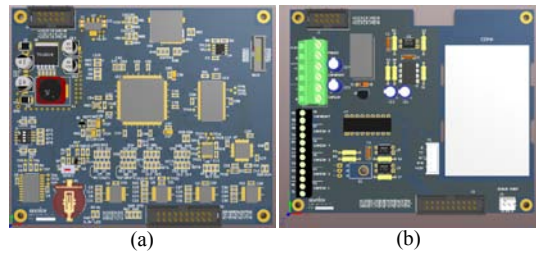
Designed PCBs (a) trail camera control module (b) image storage and transmission module
